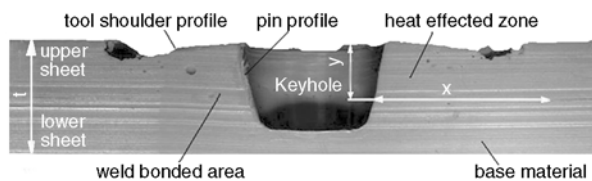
Schematic illustration of the cross section of a friction stir spot weld. x : stir zone thickness, y : the thickness of the upper sheet and t : total materials thickness
